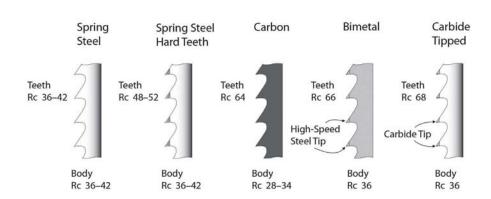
the three blades on the left are made from a single piece of metal. The bimetal blade has a hard piece of high-speed steel welded to the blade body to form the tooth. A piece of silicon carbide, which is very hard, is brazed to the body of the carbide-tipped blade
